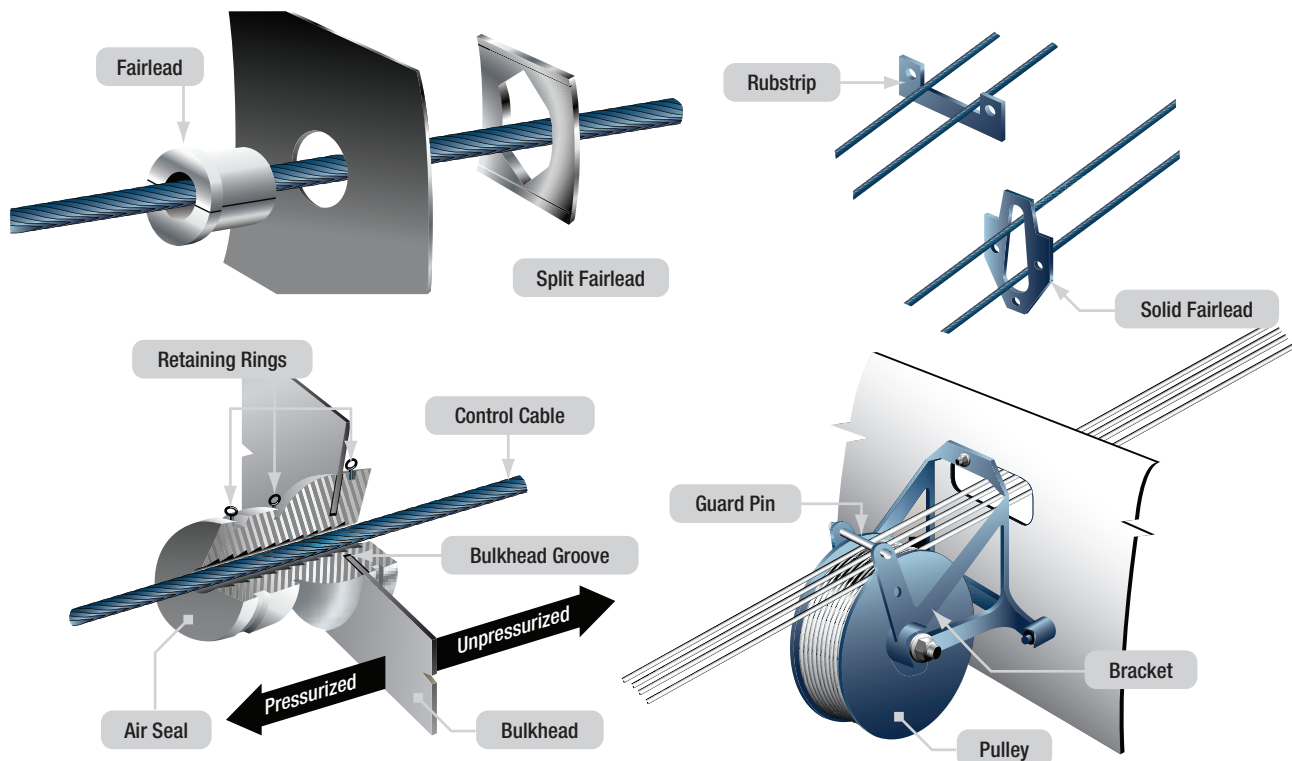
Fairleads, rubstrips, cable seals, and pulleys used to guide control cables.
